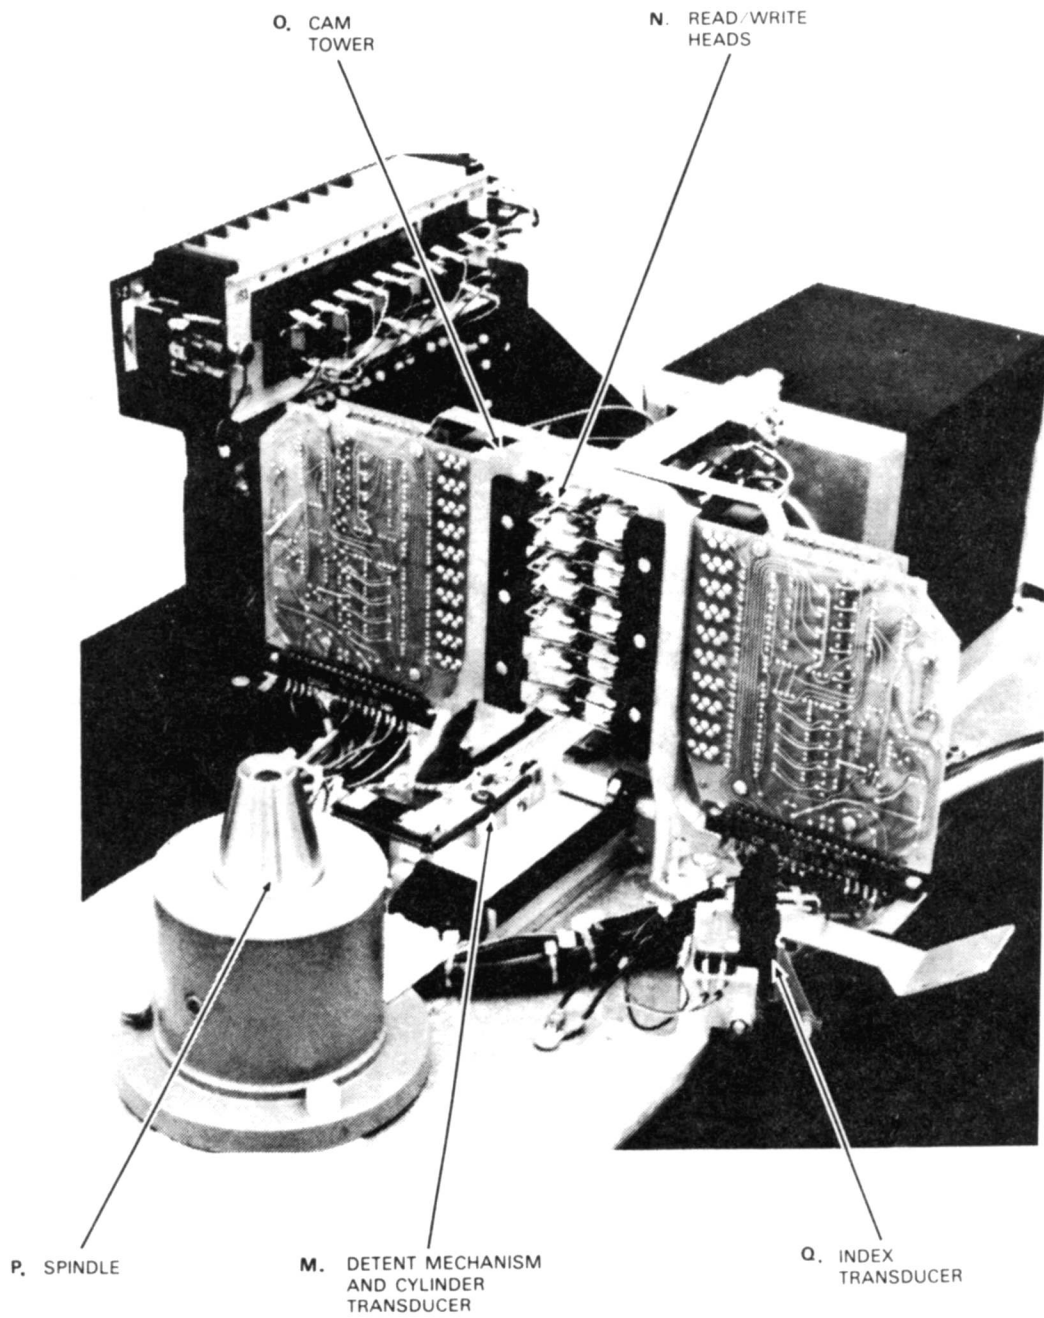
MACHINE ASSEMBLIES AND PARTS (Sheet 4 of 4)
